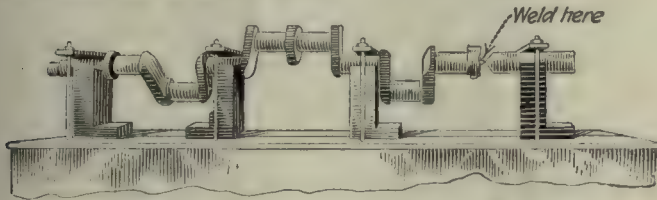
JIG FOR HOLDING CRANKSHAFTS
